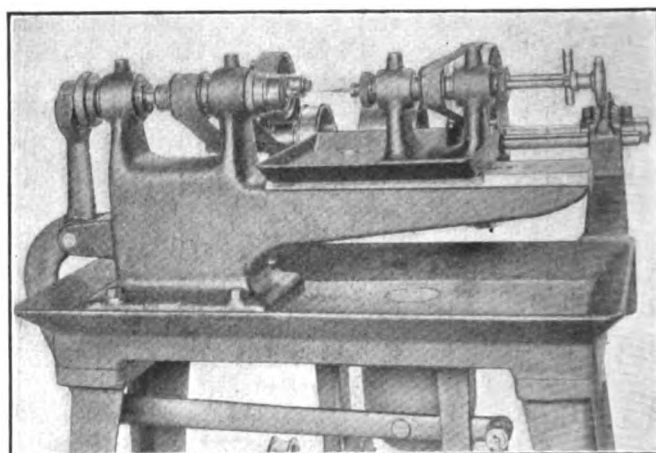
DRILLING LATHE FOR GAINES AND PELLETS
